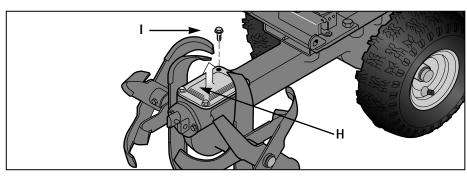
Remove transmission top cover to check the level of gear oil.
